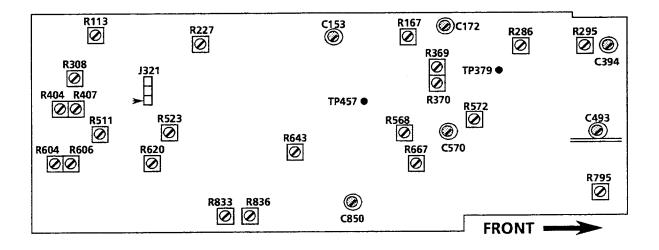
Adjustment locations on the Vectorscope circuit board (Assembly A6)
